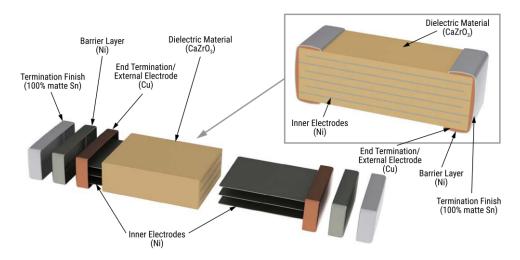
Exemplary assembly of a KC-Link capacitor [99]
